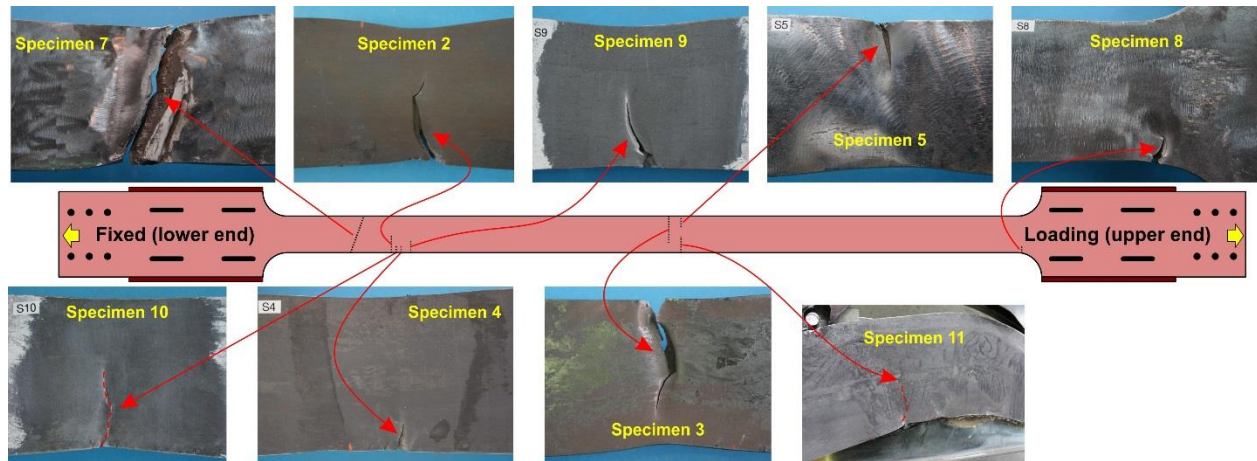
Locations of fracture and close-up views of the fractured zone for selected specimens.
